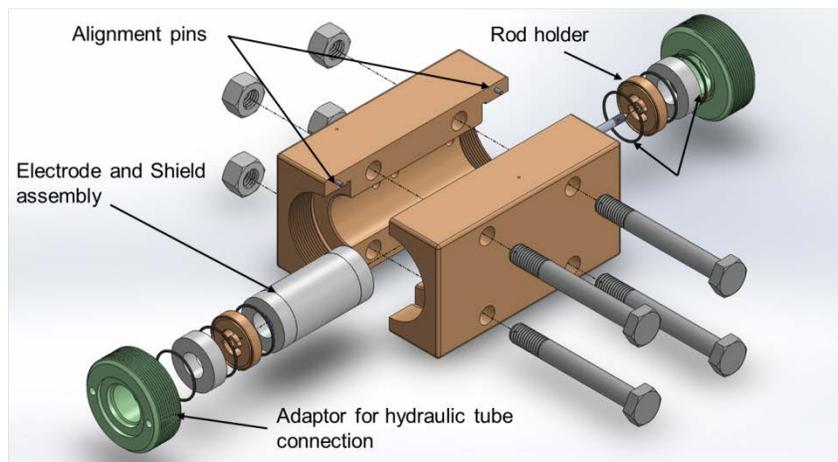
Exploded view showing flow-through design of the sensor and arrangement of different metallic parts and dielectric assembled
